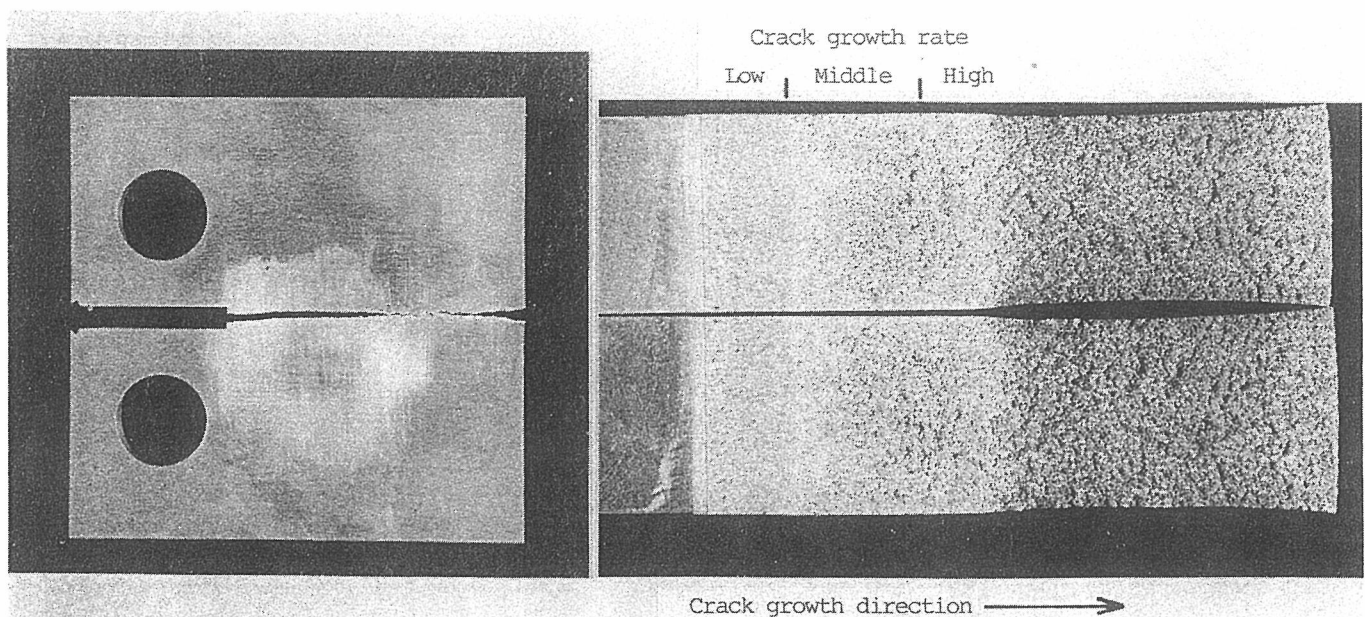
Fracture surface of 1-in. 5TCT specimen for fatigue crack growth rate test; chiller side at position 5 in casting.
